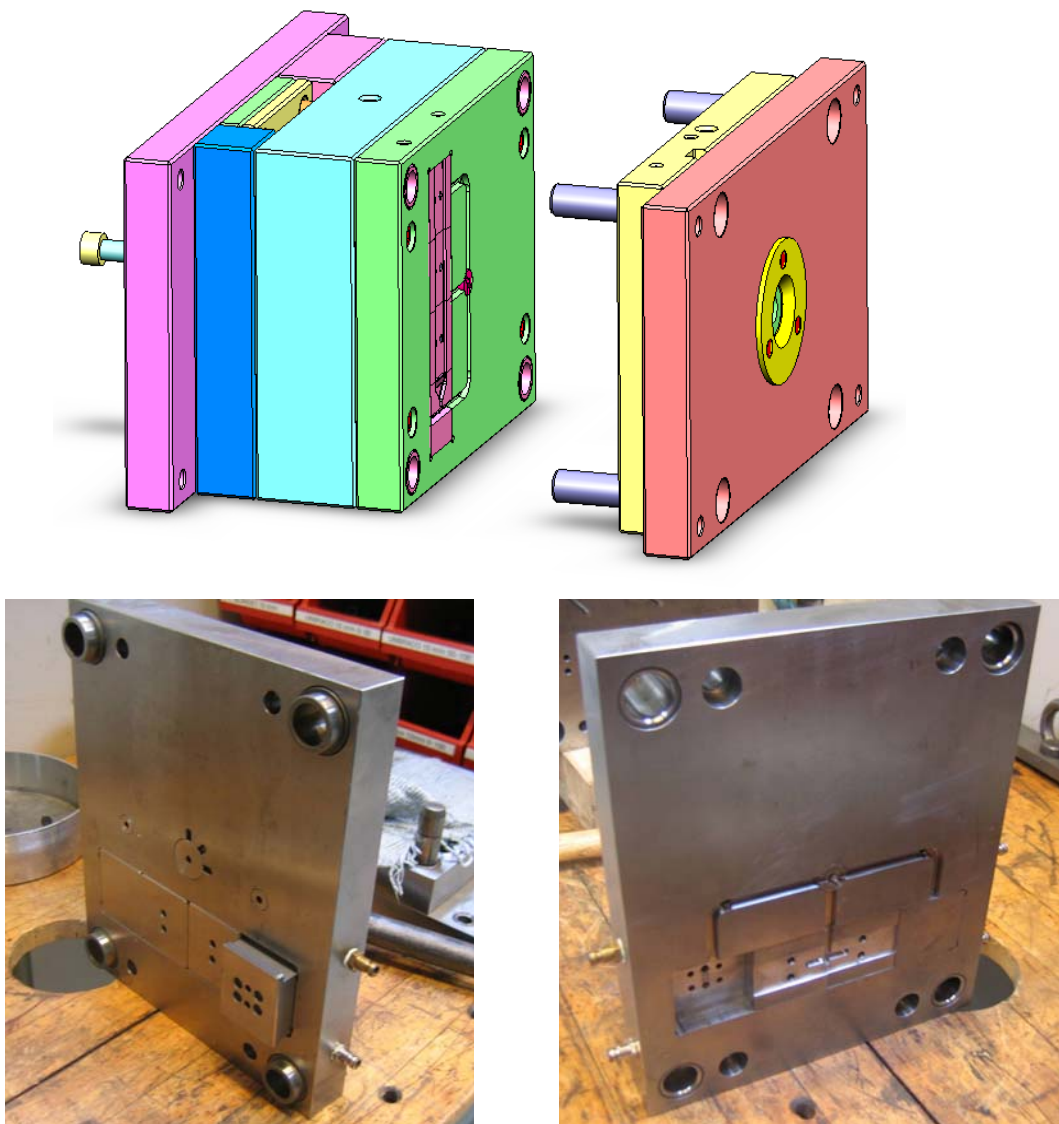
CAD model of experimental mold (no specific scale); employed mold and particular of the micro cavity insert.
